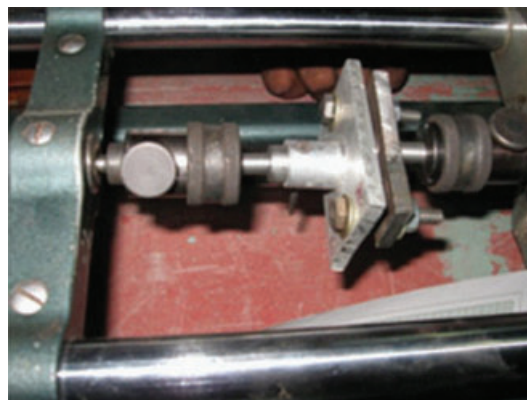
Assembly of tube-to-tube plate before FWTPET process.
